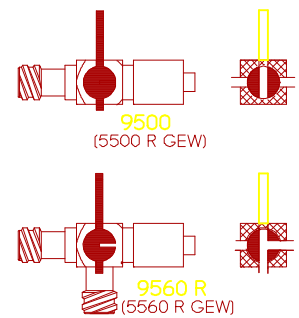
Recommended metal stopcock, on the right the bores of the stopcock plug
